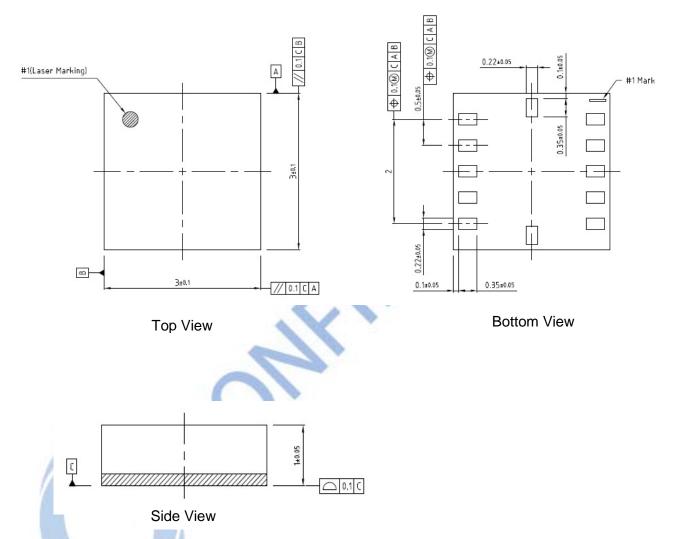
Top, Bottom and Side views of the LGA Package (Dimensions in mm)
